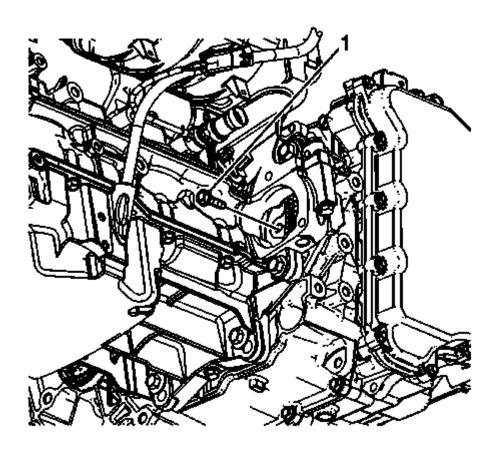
Oil Level Indicator Tube Components Courtesy of GENERAL MOTORS COMPANY
